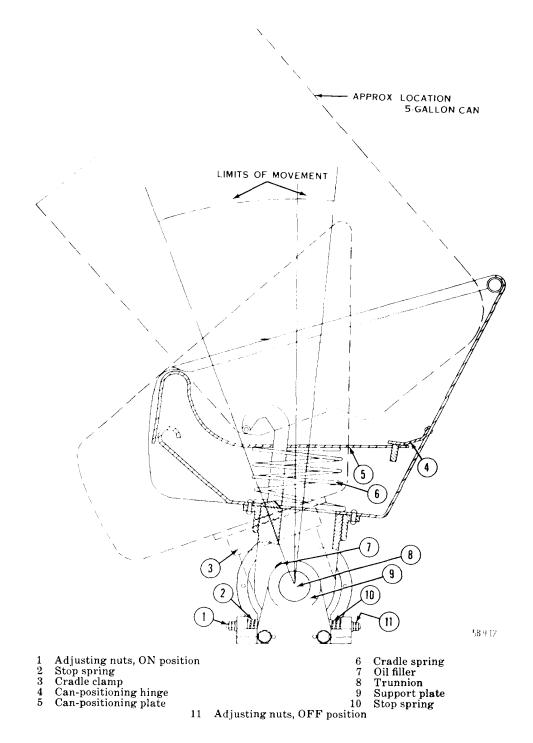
Cradle and cradle-valve assemblies, showing approximate limits of movement of cradle, side view (Model 4310CA).
